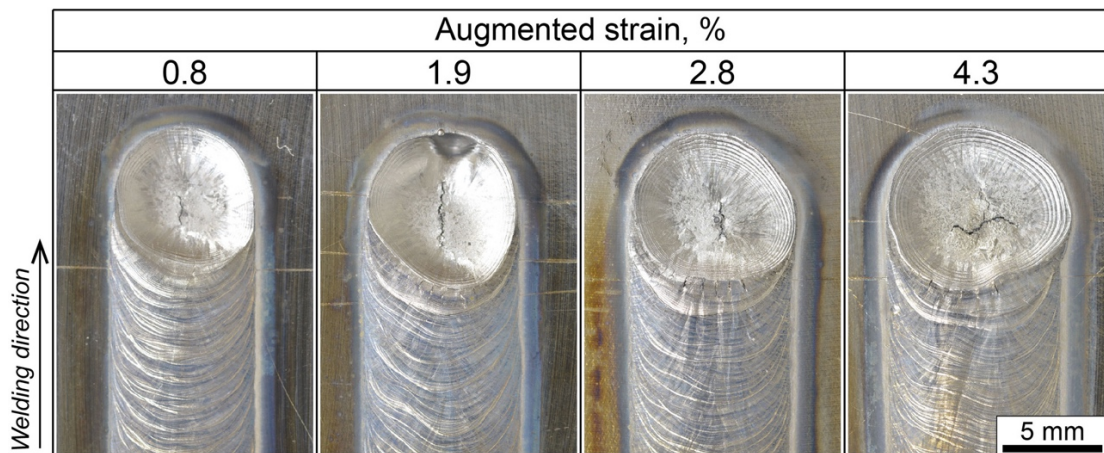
Appearance of weld bead after trans-varestraint test.
